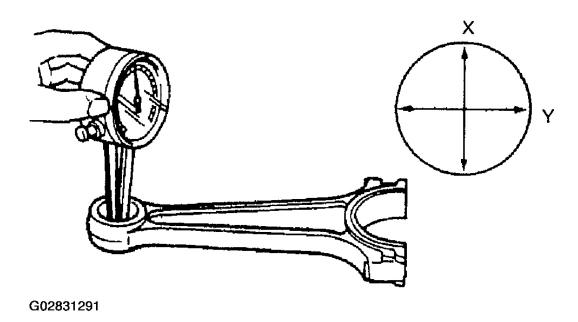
Measuring Connecting Rod Small End Inner Diameter Courtesy of MAZDA MOTORS CORP.
